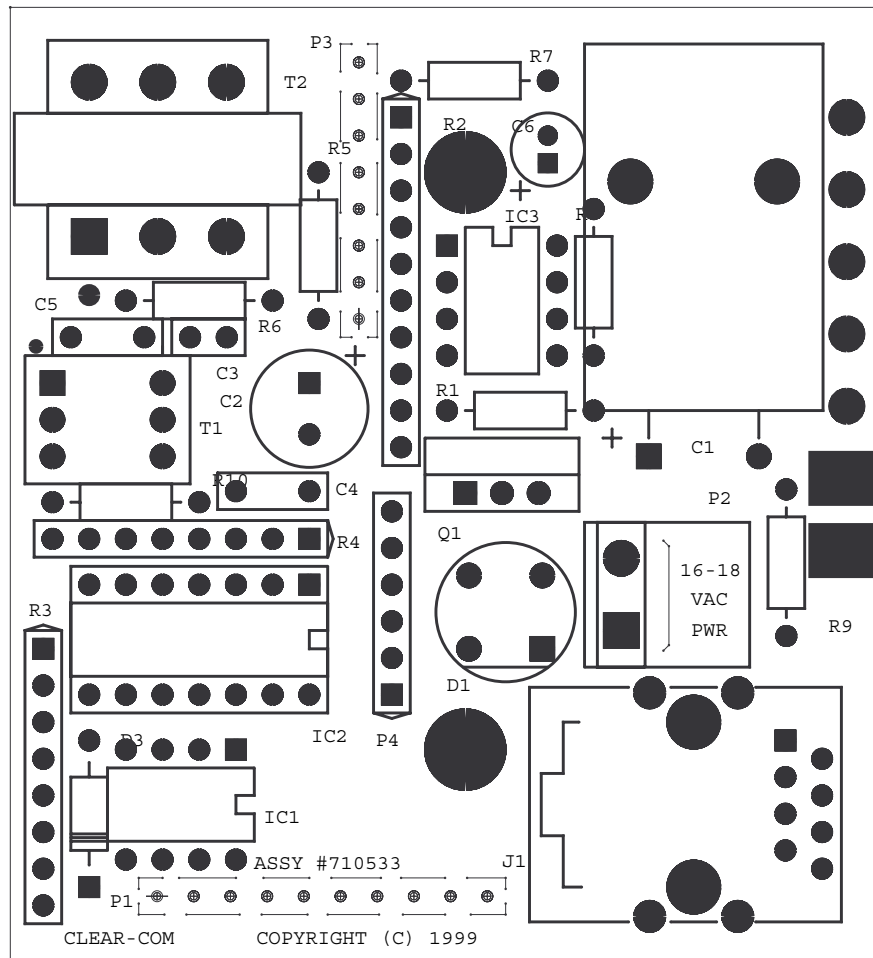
Matrix Option PCB Component Layout (part no. 710533)
